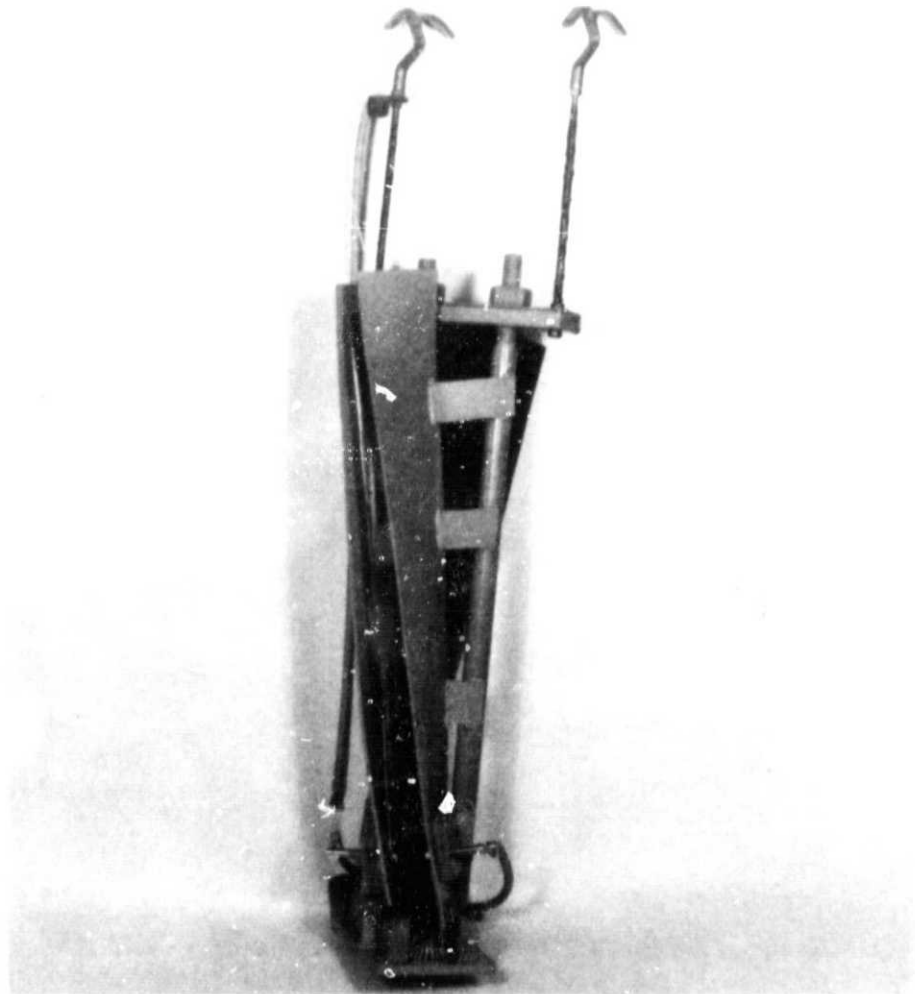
Composite Fan Blade in Leading Edge Sheath Plating Fixture
